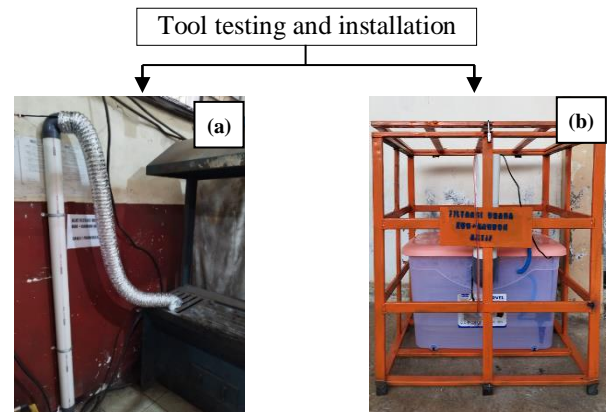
(a) Welding fume inlet, (b) Welding fume filter unit.
